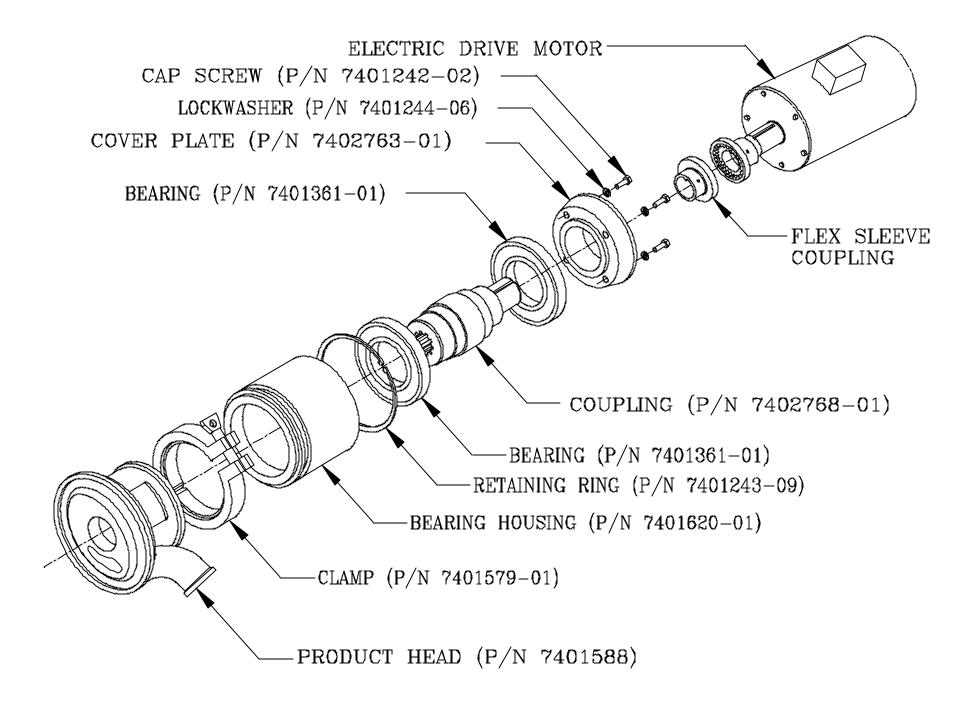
Upper Bearings, Direct Coupled, Electric Drive Motor Backside of Figure 7-17
